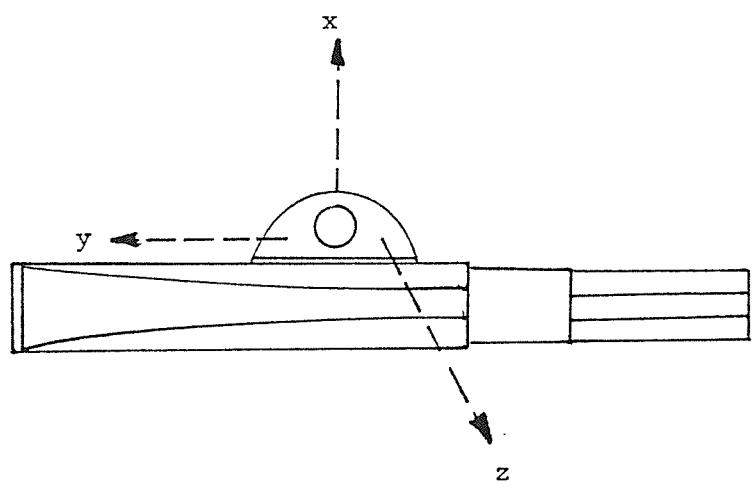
Position of ring type accelerometer mount on chipping hammer chisel
